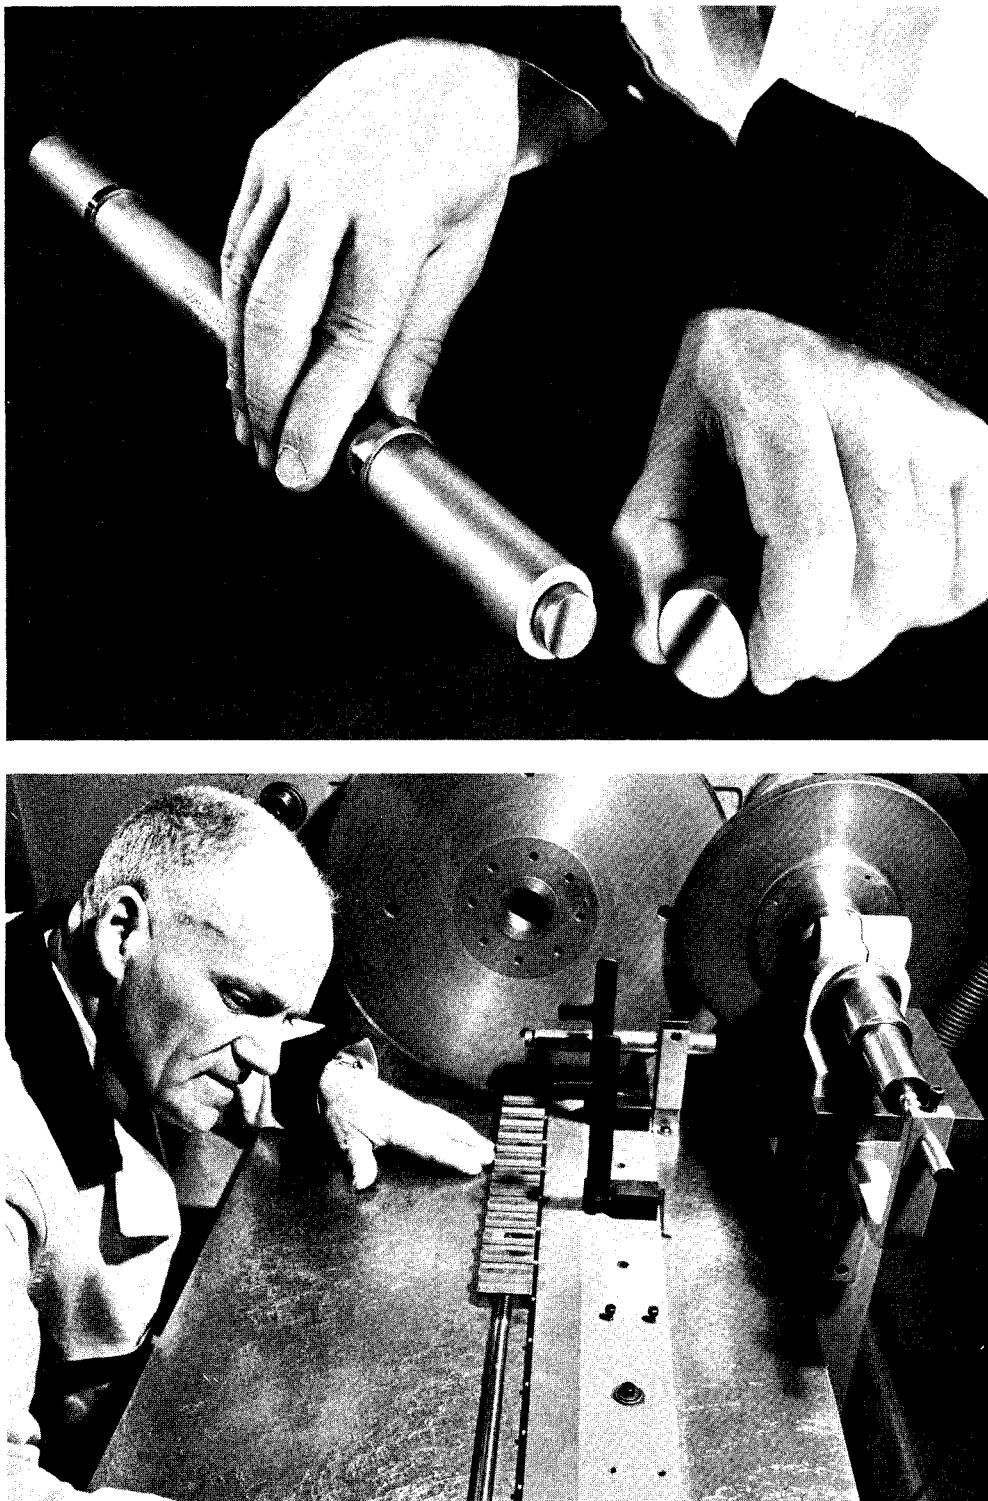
Gaging faces of the Step Gage are lapped on a special fixture. Great care must be taken in the lapping operation to maintain the "geometry" of the faces. If
